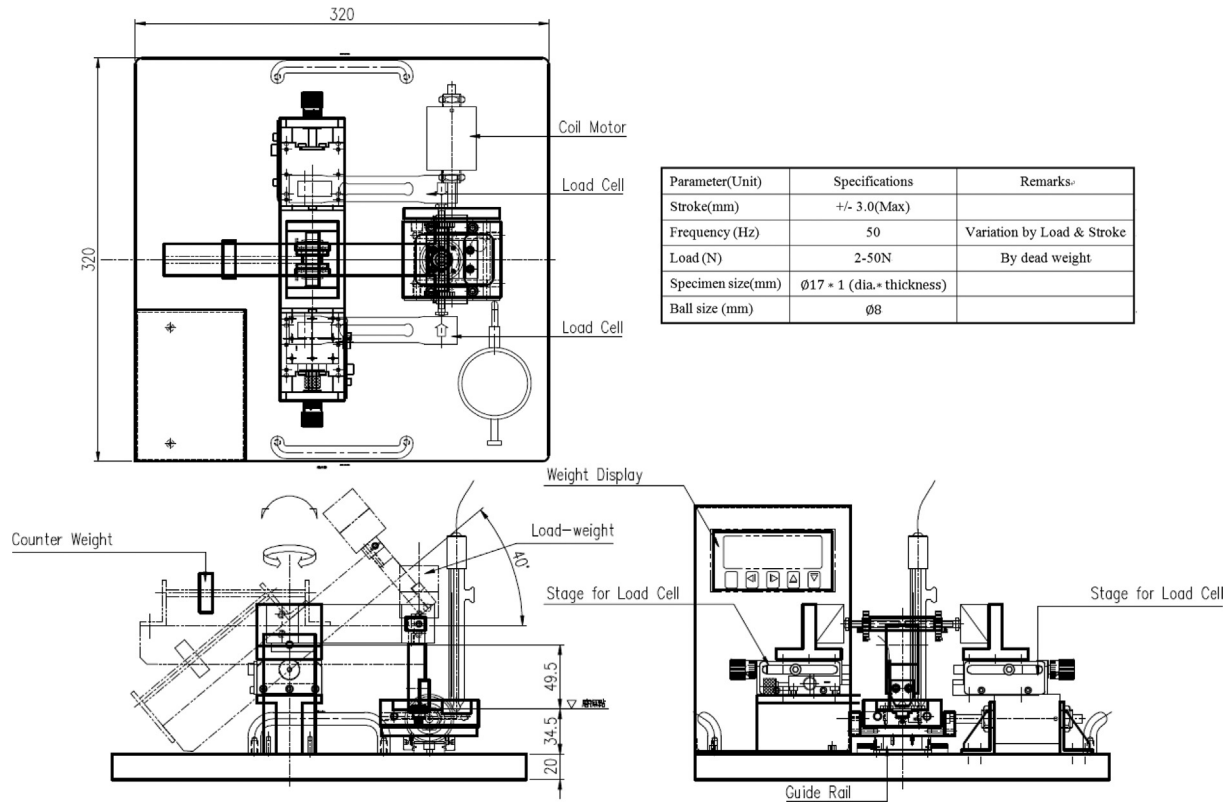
Design drawing of fretting corrosion-wear equipment.
